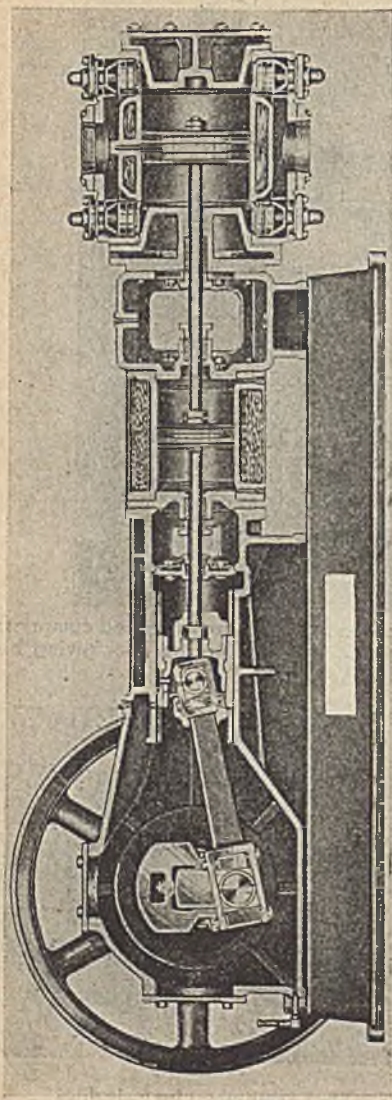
Horizontal single stage water cooled compressor direct connected steam drive.
